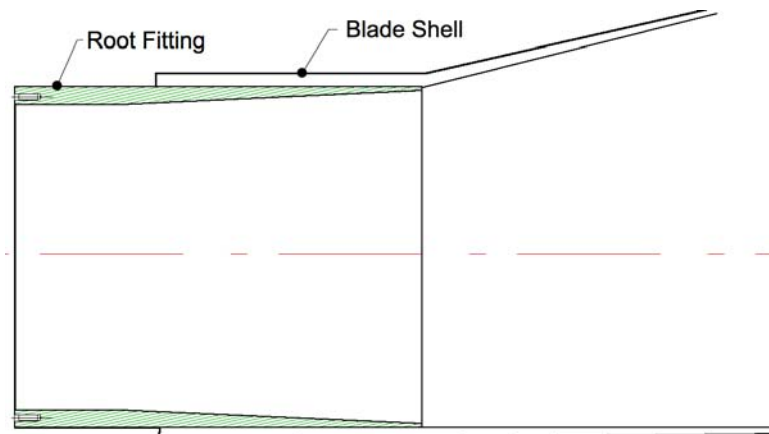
Schematic drawing of a one-piece bonded root fitting.
